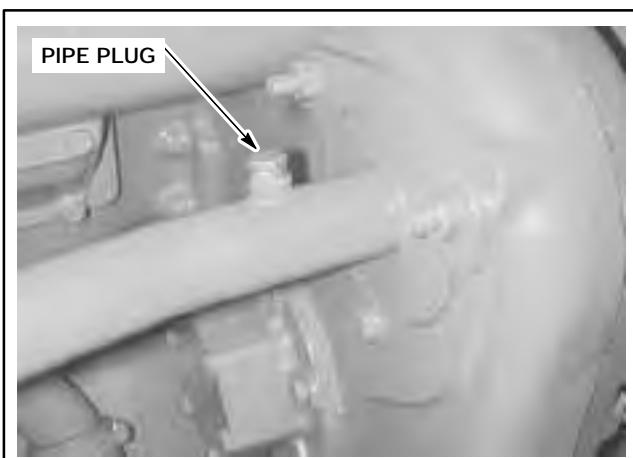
Current Upper Oil Separator Inlet Tube
